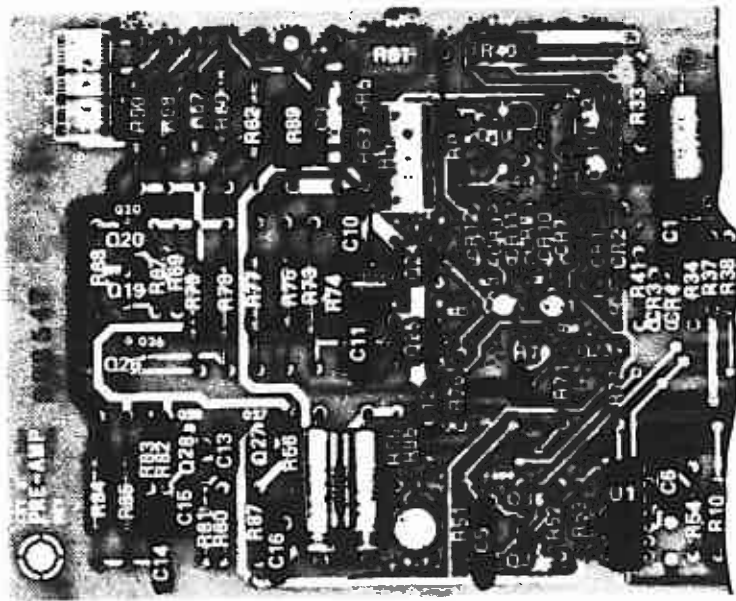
MODEL 4265A PRE-AMPLIFIER PCB ASSEMBLY
